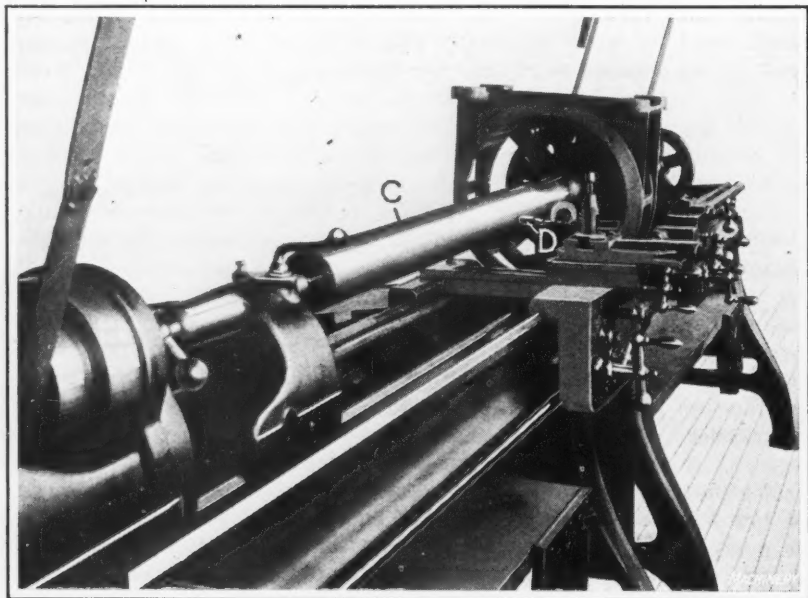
Using Milling Machine Over-arm and Micrometer mounted in Toolpost to align Lathe Beds
